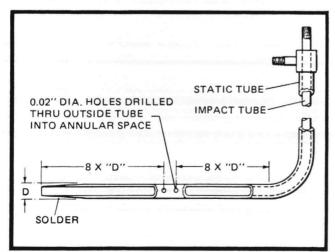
CONSTRUCTION OF PITOT TUBE
